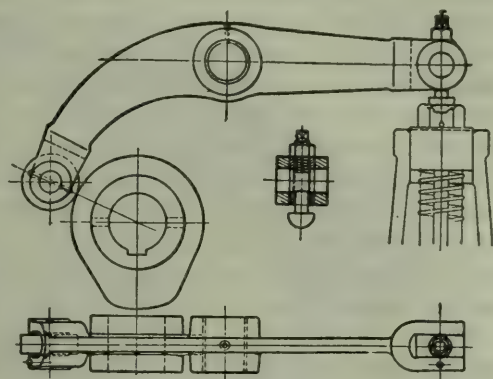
Elements of a gear for operating an air or an exhaust valve.
